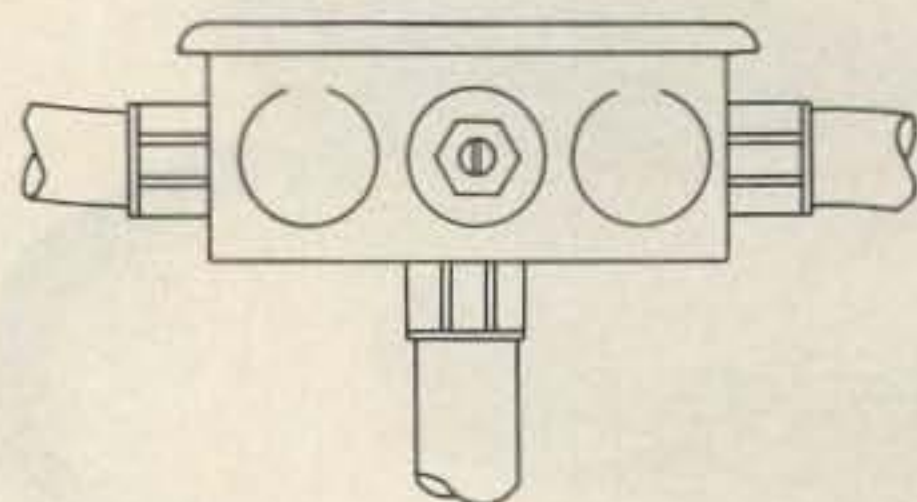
PVC adapters and a breakout box make for easy mounting.
